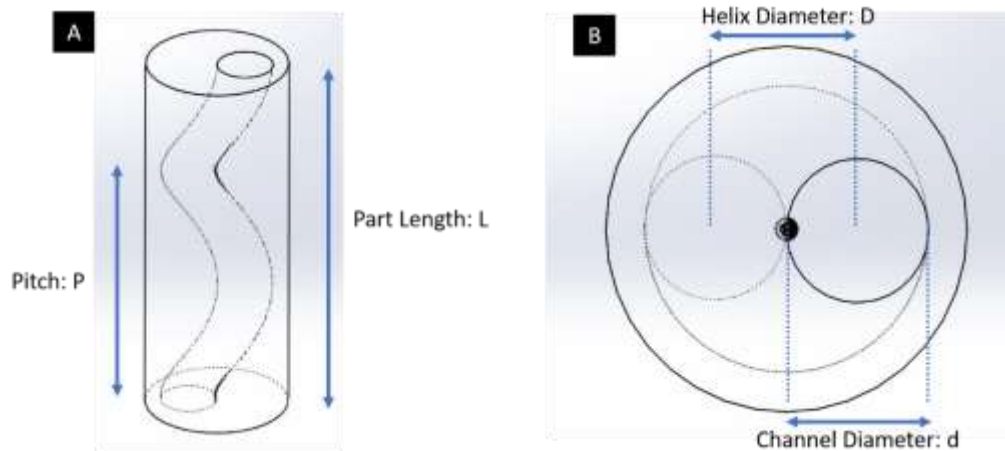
Dimensions for parts containing helical channels: (A) Isometric view, (B) Top view
